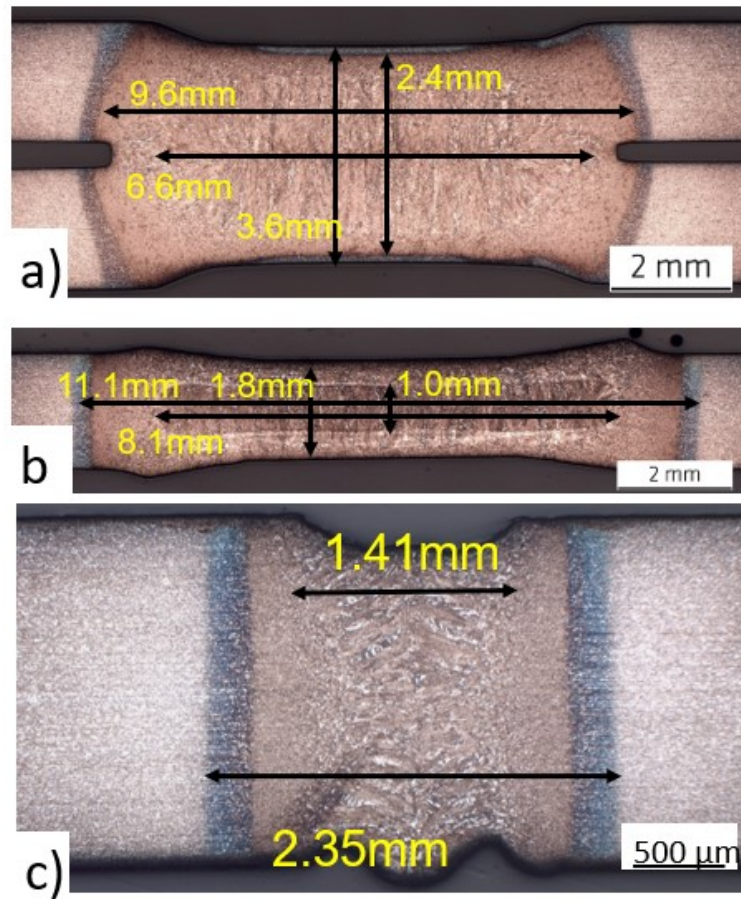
Macrostructure of welded joint of DP1000: (a) RSW of two plates; (b) reproduced WM of RSW of one plate; (c) LBW
